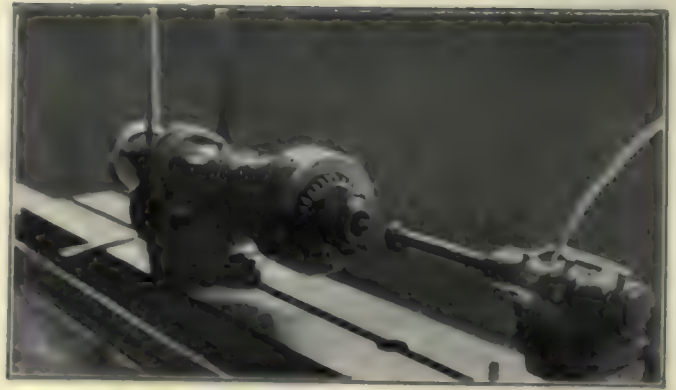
THE CHUCK UPON THE GRINDING MACHINE set. The work can then be handled into and out of the chuck as a unit.
